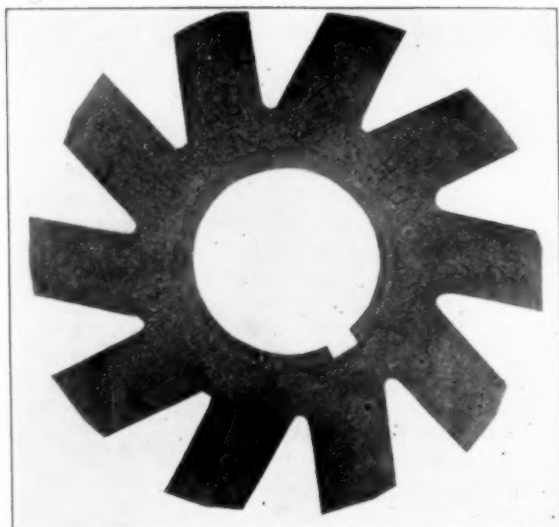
CAST HIGH-SPEED STEEL MILLING CUTTER USED IN TEST;
